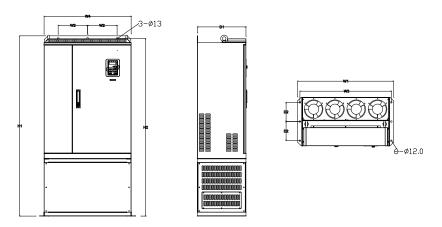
Floor installation of 660 V 250-350 kW VFDs
